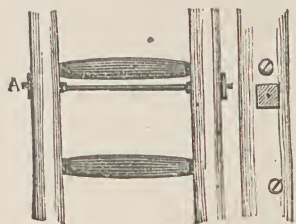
FRONT VIEW. FIG. 540. SIDE VIEW.
